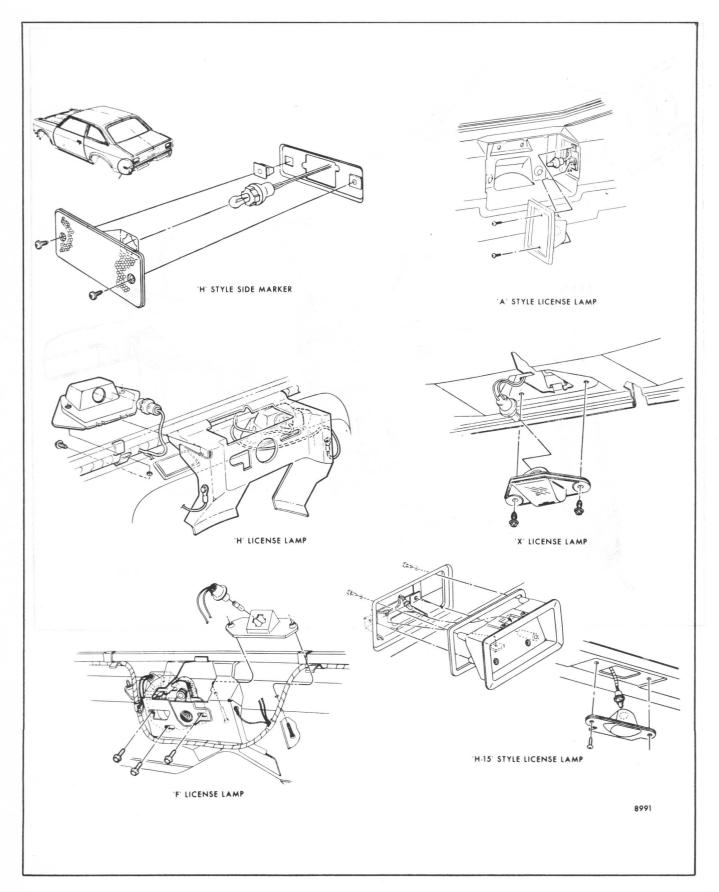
Exterior Lamp Installation - Chevrolet Styles
